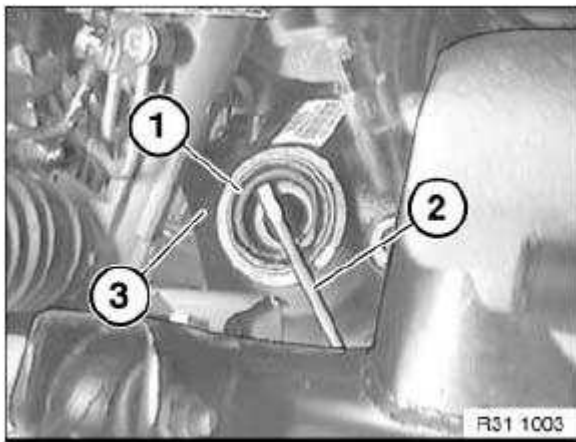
Shaft Seal, Screwdriver And Front Differential
